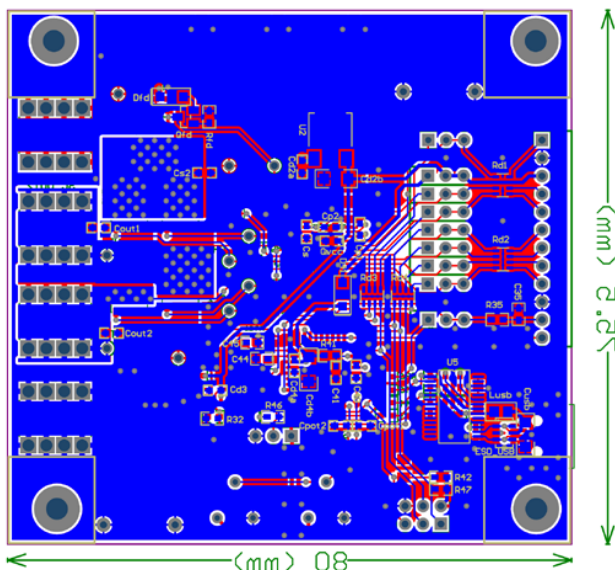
NCV7535 EVB PCB Bottom Composite Drawing
